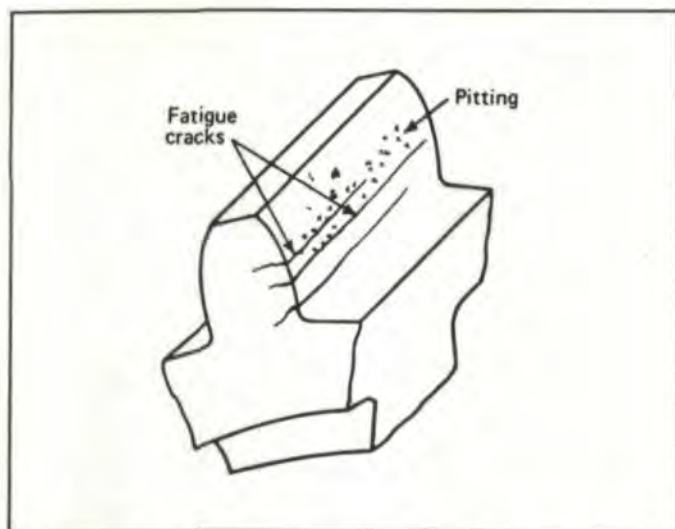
Typical pits and fatigue cracks⁽⁷⁾
